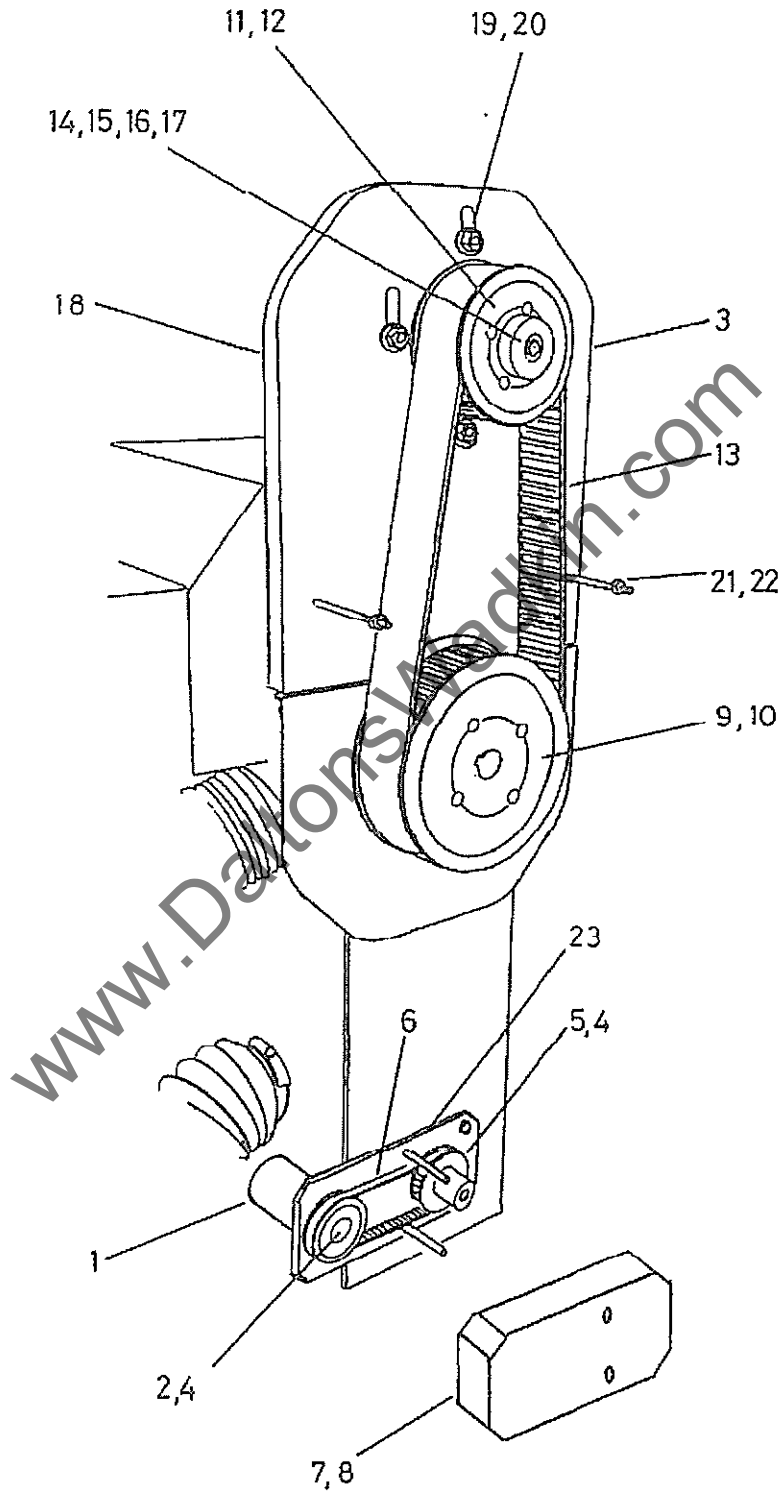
HYDRAULIC DRIVE TRANSFER TO FEED ROLL GEARBOXES
